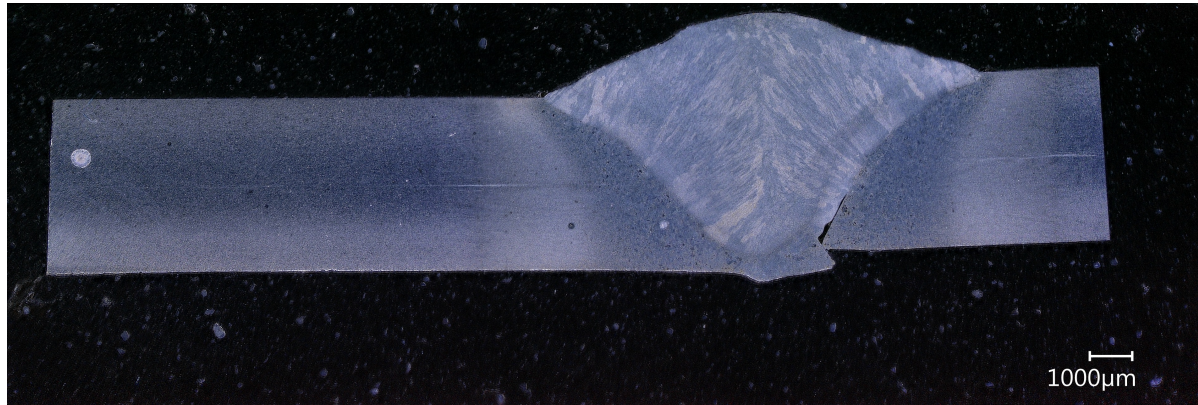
Cross-sectional specimen of the single pass weld.
